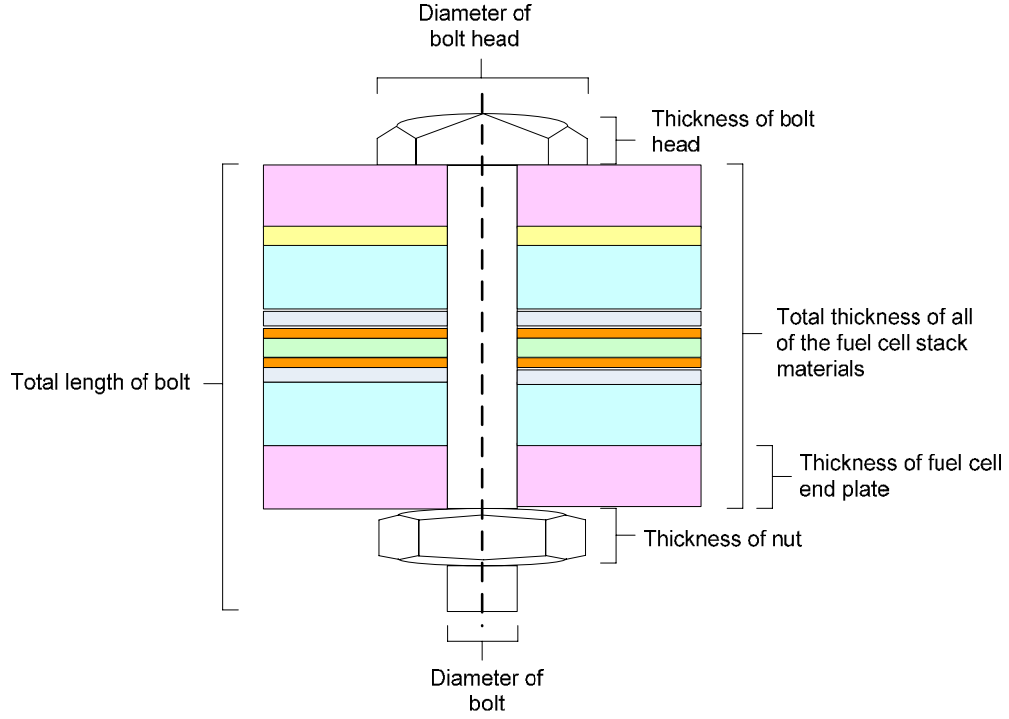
Dimensions used in the bolt and layer stiffness calculations
